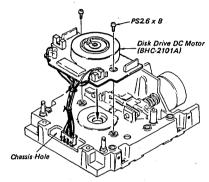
Disk Drive DC Motor (BHC-2101A)
